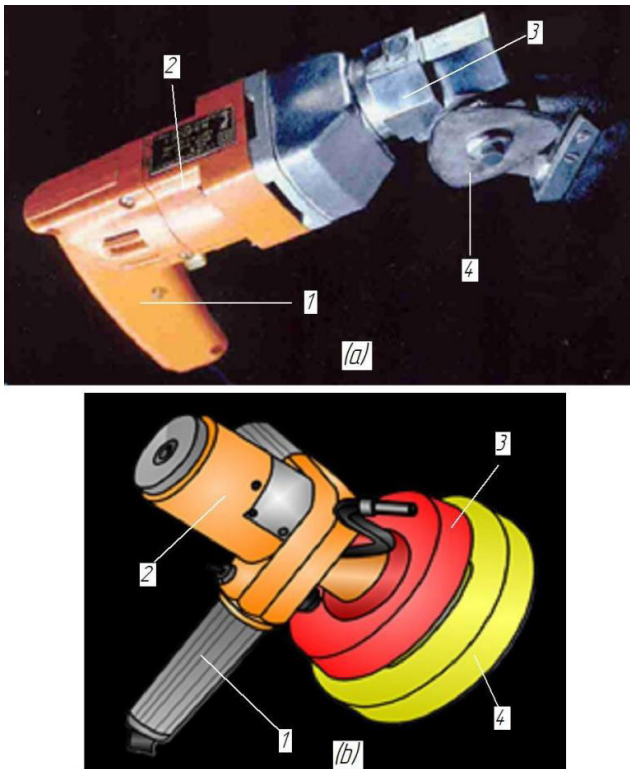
Experimental hand-held machine: (a) for cutting and grinding; (b) for polishing and grinding
